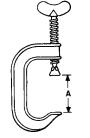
R-1455, R-1619, and R-1748 Clamping Tool
